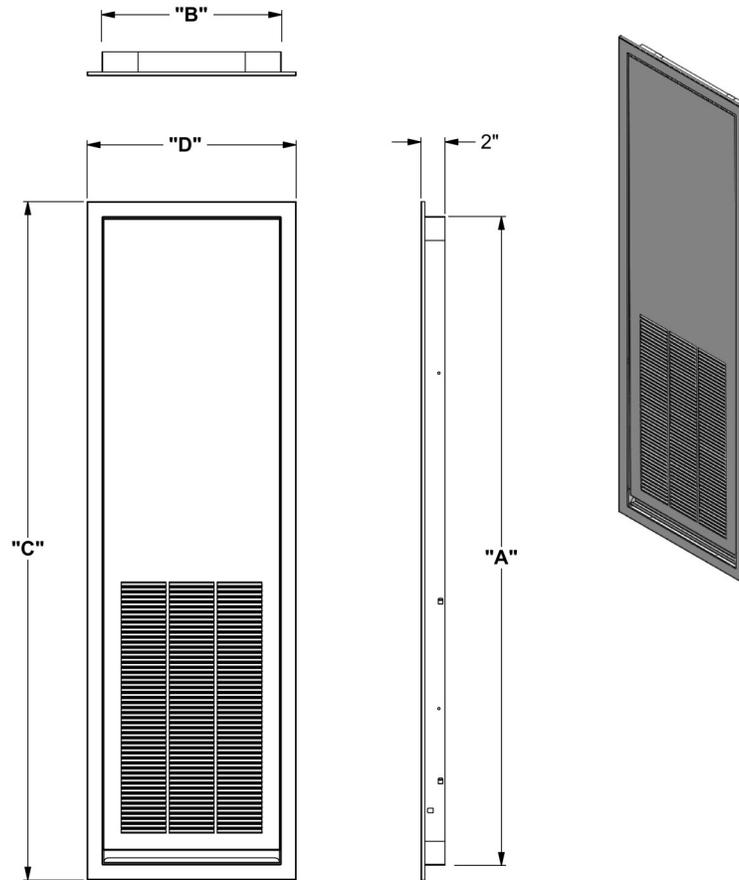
Acoustic Panel Dimensional Drawings
